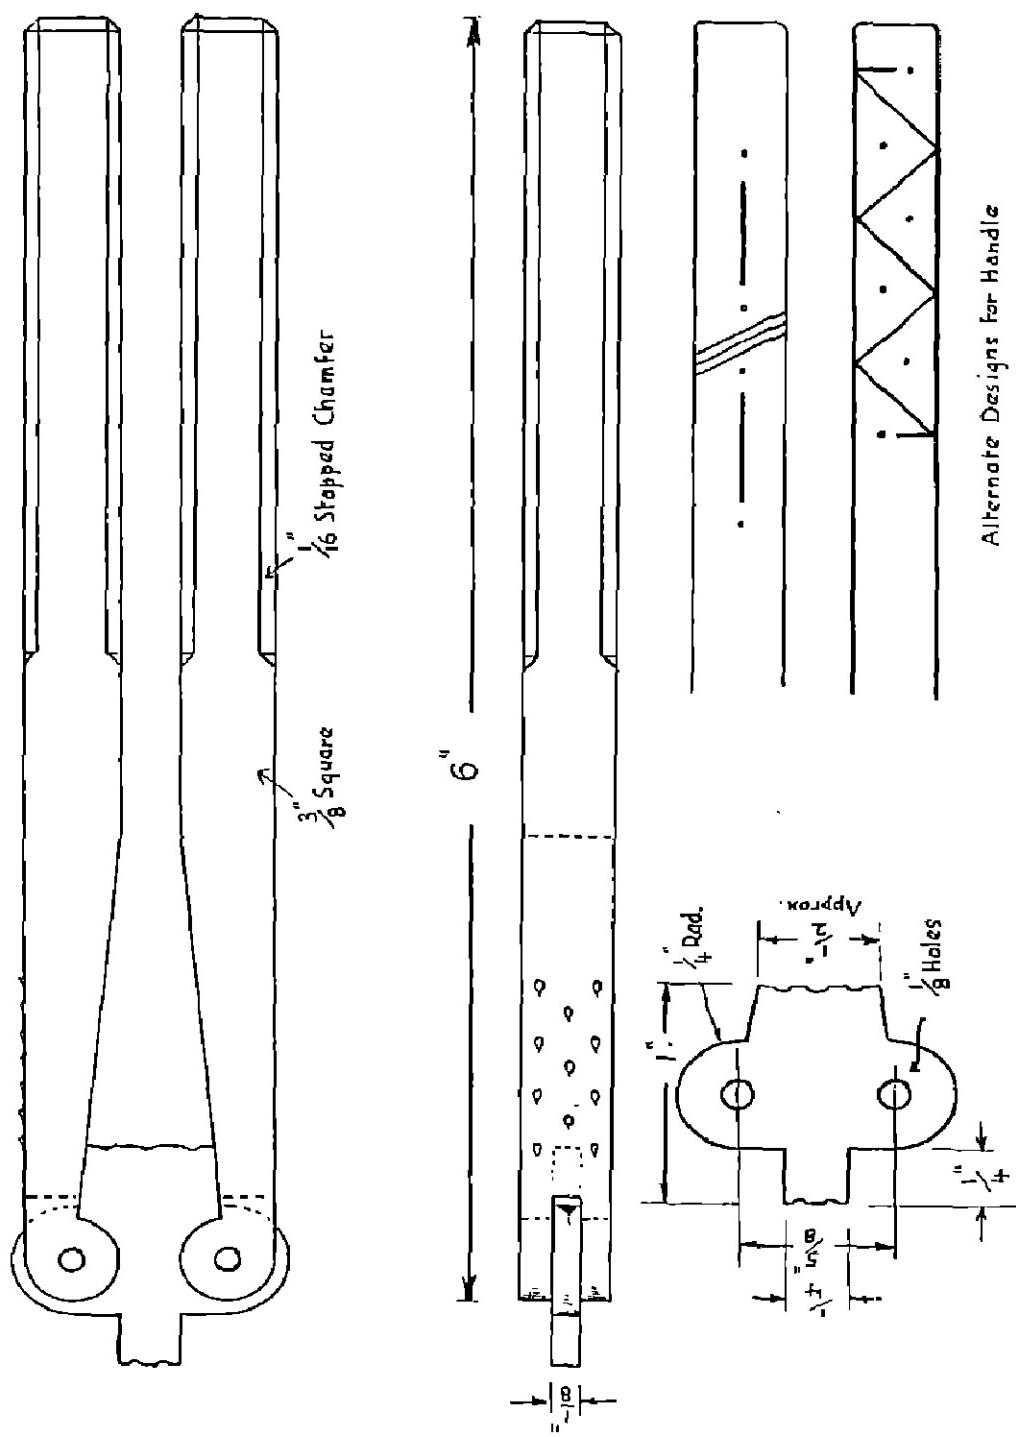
WORKING DRAWINGS OF NUTCRACKERS—ALTERNATIVE DESIGNS FOR HANDLE
